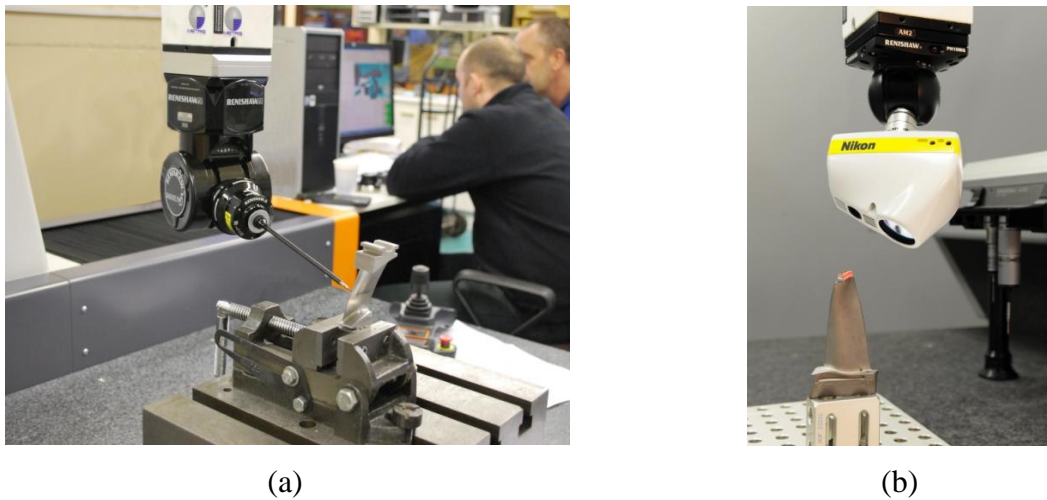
Measurement of a blade: (a) Contact point-by-point CMM measurement (METRIS machine) [121]; (b) Non-contact laser scanning CMM measurement (Nikon metrology labs).
